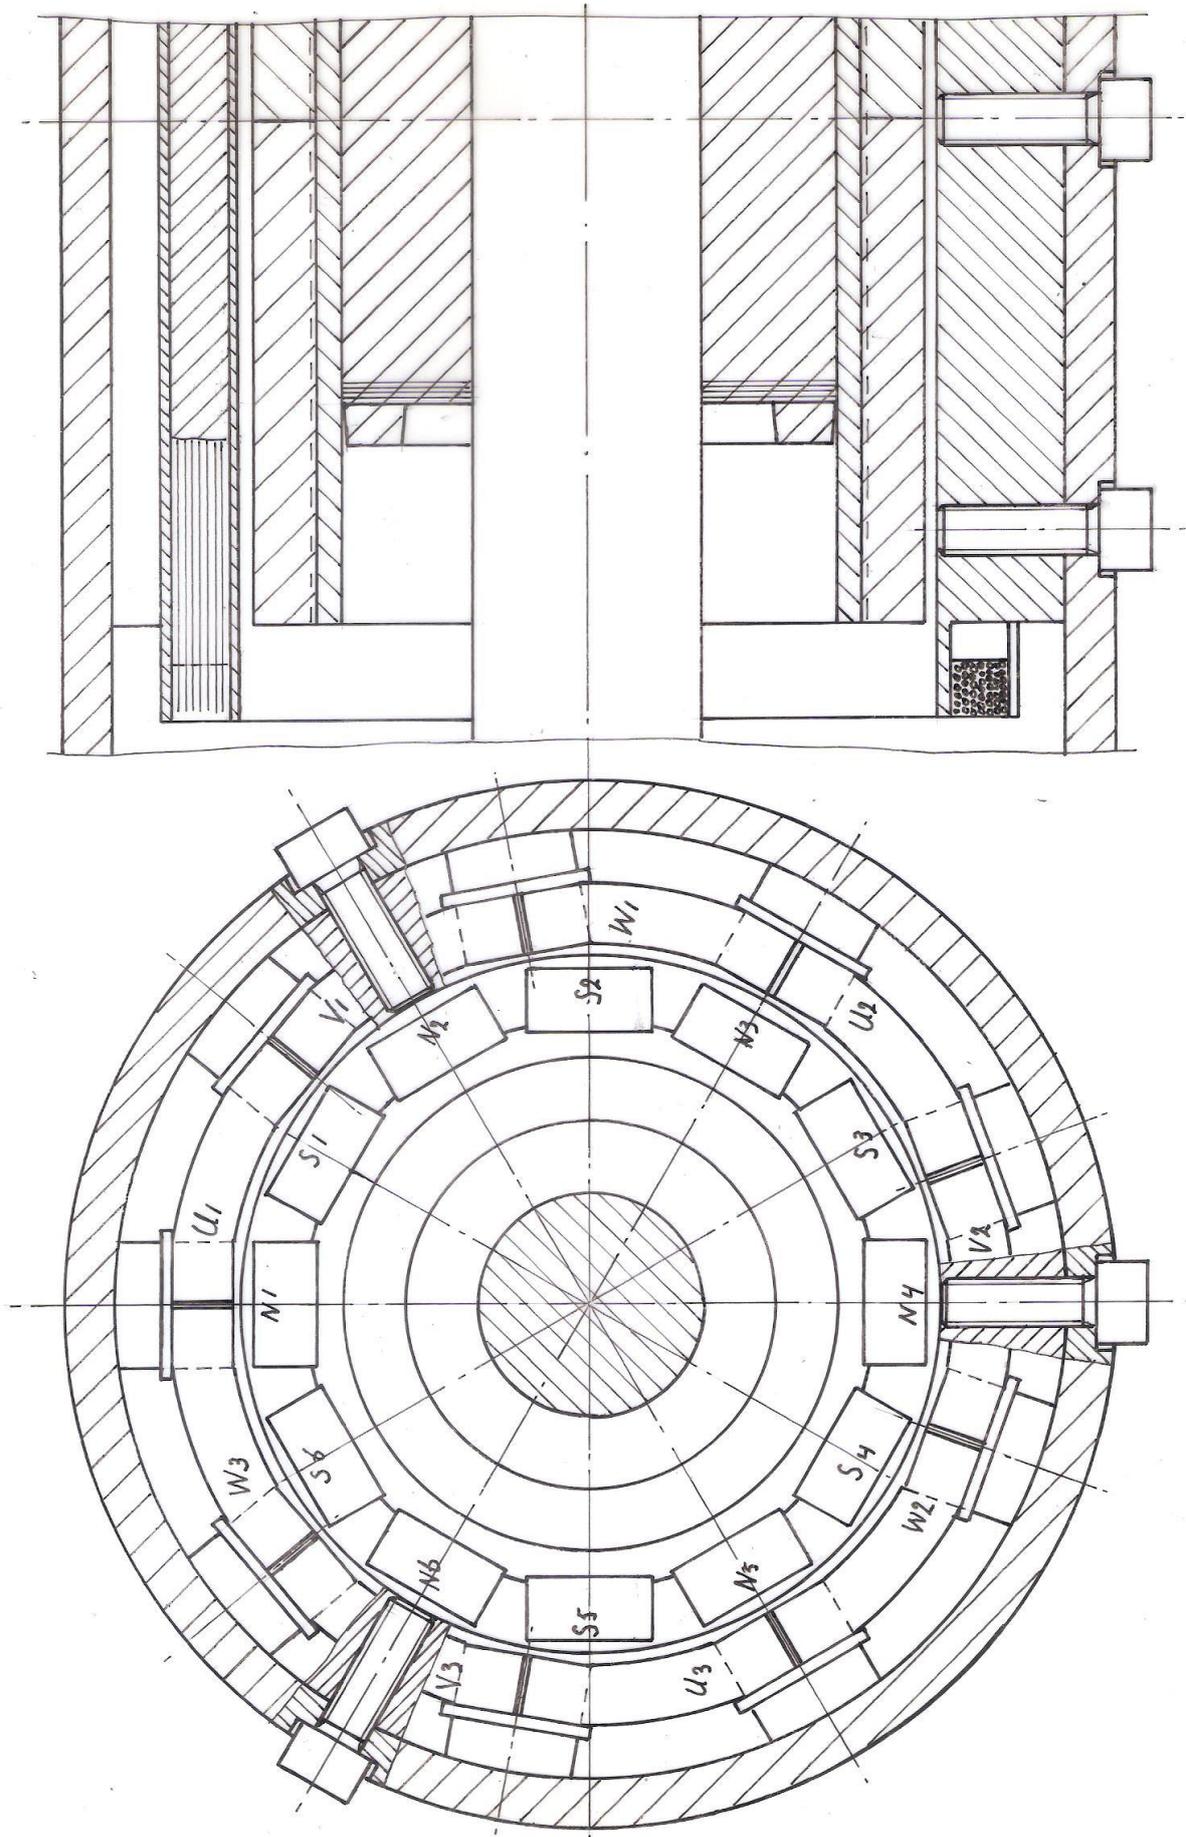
12-pole PM-generator, 3-phase stator with a 1-layer winding with three coils per phase
